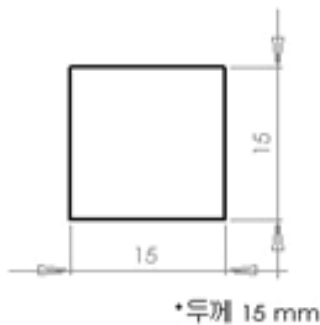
Dimensions of the surface hardness test were prepared using a 3D printer
